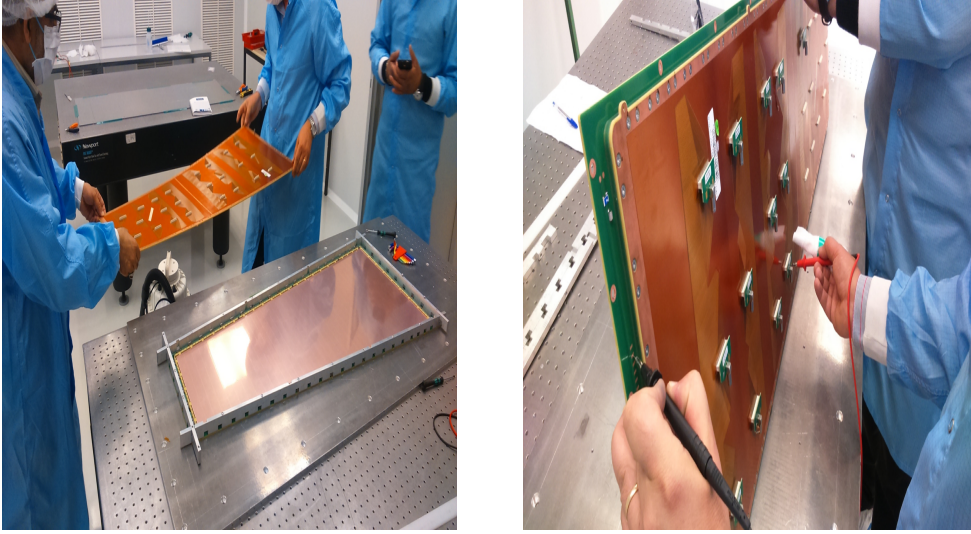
Mounting the readout board on the stack (Left). Testing the assembled chamber using Megger (Right).
